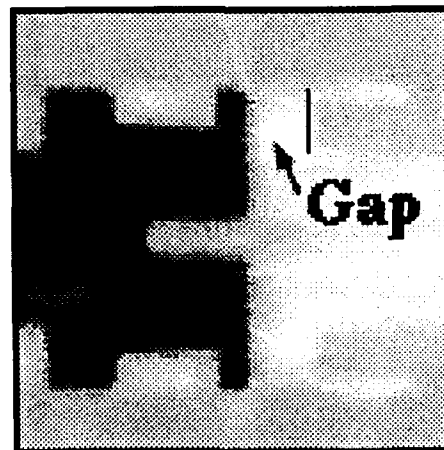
Enlargement of the shutoff spool valve showing gap.
